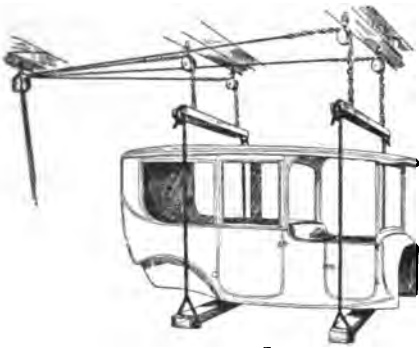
Closed bodies may be removed without strain by the aid of the hoisting cradle illustrated. Two cross pieces are attached to separate chain hoists and are so spaced that they hang 2 ft. from the ends of the body to be removed. First one end of the body is pried up, and a lower cross-member slipped beneath it. Then the other end is raised, and the other lower member put in place. The steel stirrups are then used to attach the lower and upper cross pieces, after which the body may be raised and the chassis rolled from under.
